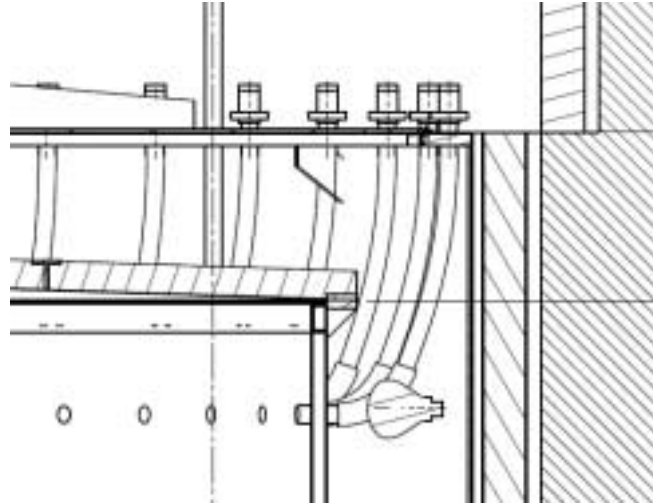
Fig.-51. Side view of the cable exit guide tubes
